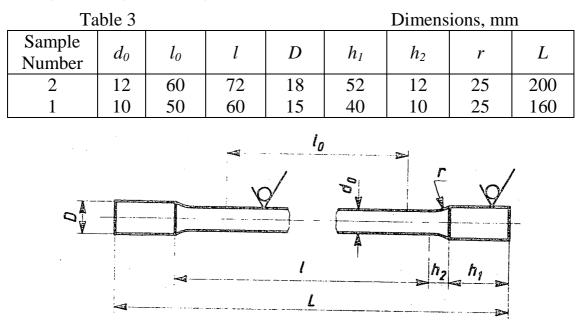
Shape and dimensions of sample of die/chill casting & sand molds
